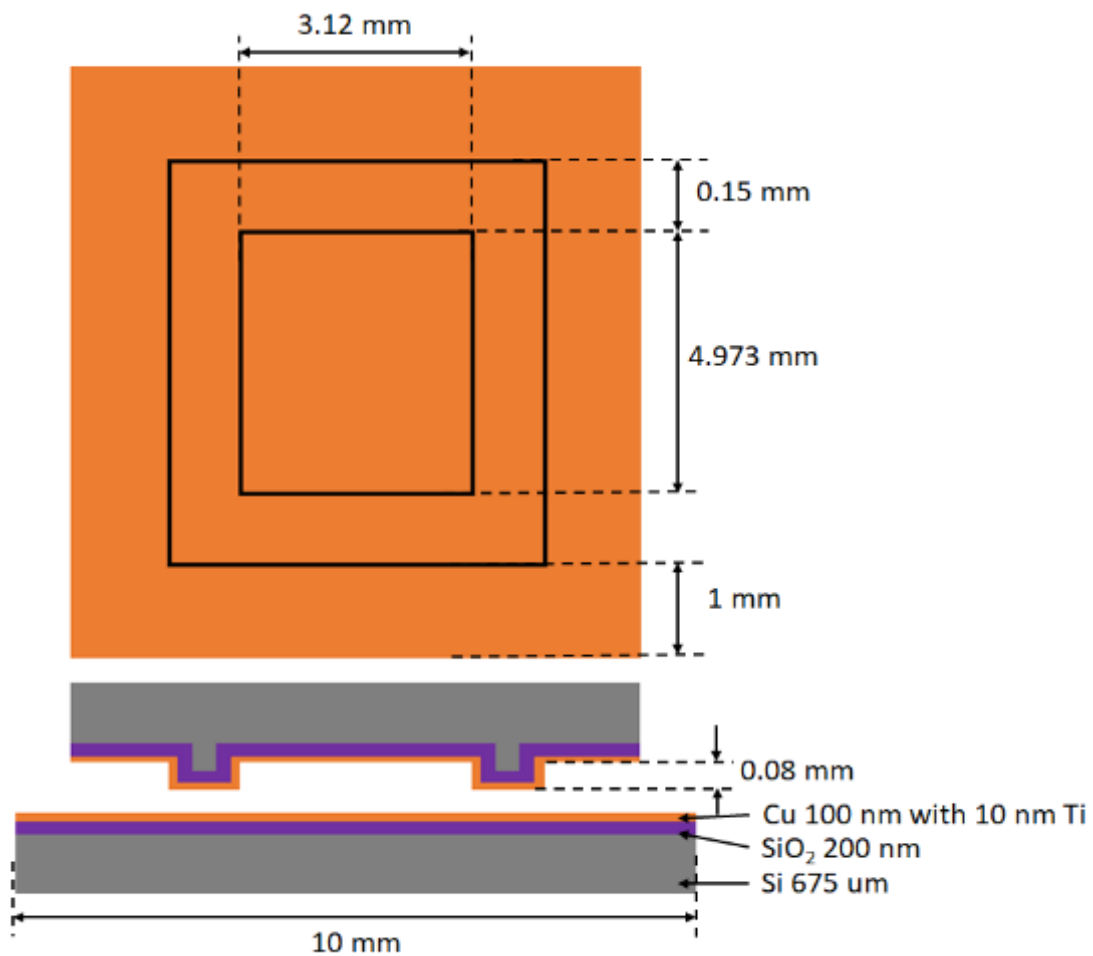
Hermetic seal test sample schematic with sealing ring dimensions and top and bottom dies configuration (not drawn to scale)
